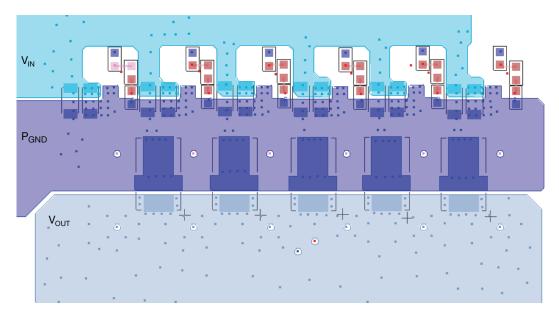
Multi - Phase VRPower Layout Bottom View
